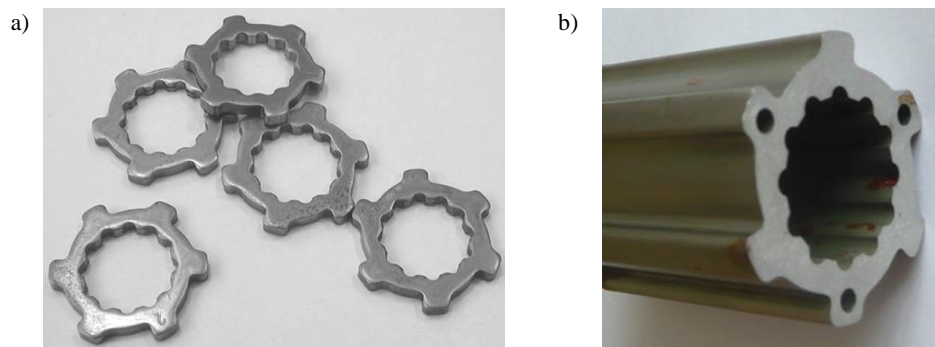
Parts manufactured by fine blanking (a) and view of ejector (b)
